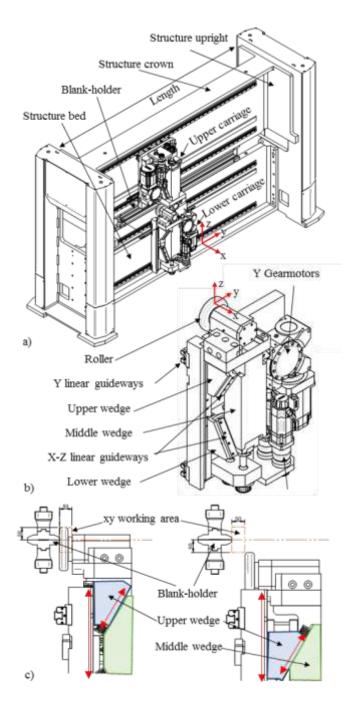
IRF prototype and details: a) machine, b) carriage, c) vertical and horizontal movements.
